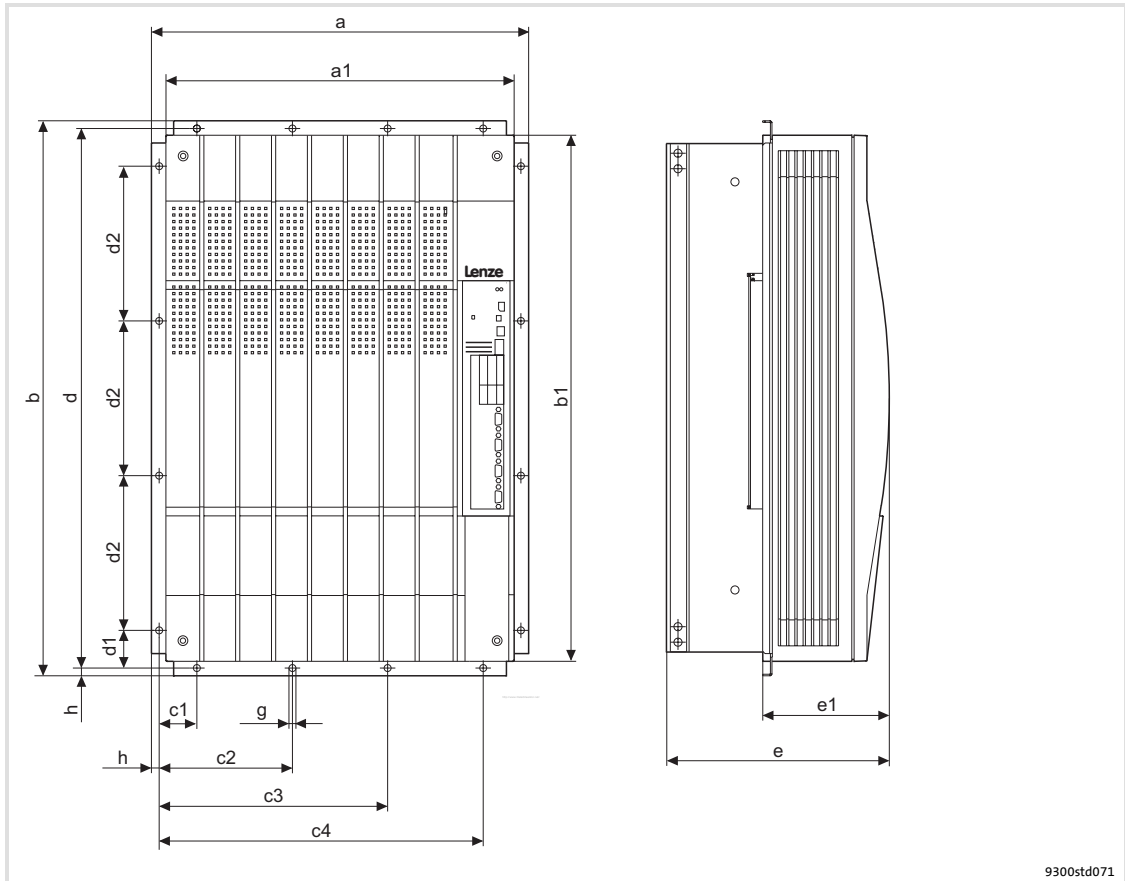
Dimensions for thermally separated mounting 55 ... 75 kW
